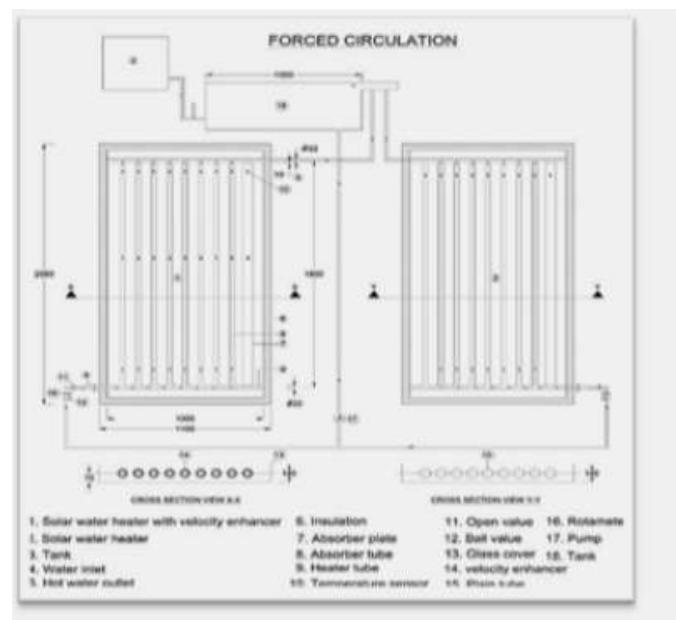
(a) Solar flat plate water heater with and without heat transfer enhancers
